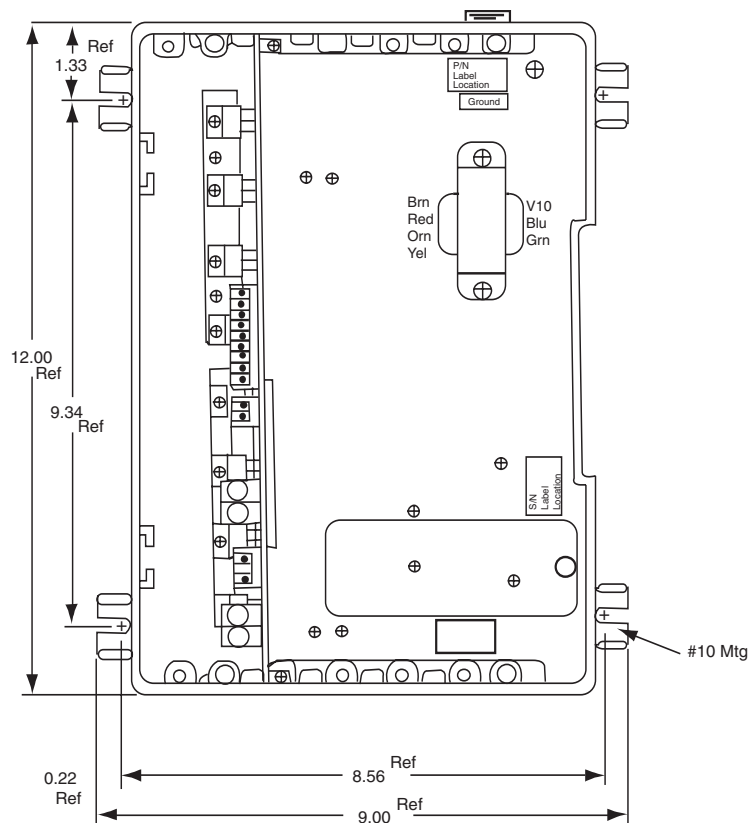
CONTROLLER MOUNTING DIMENSIONS, RBA2C-RG
